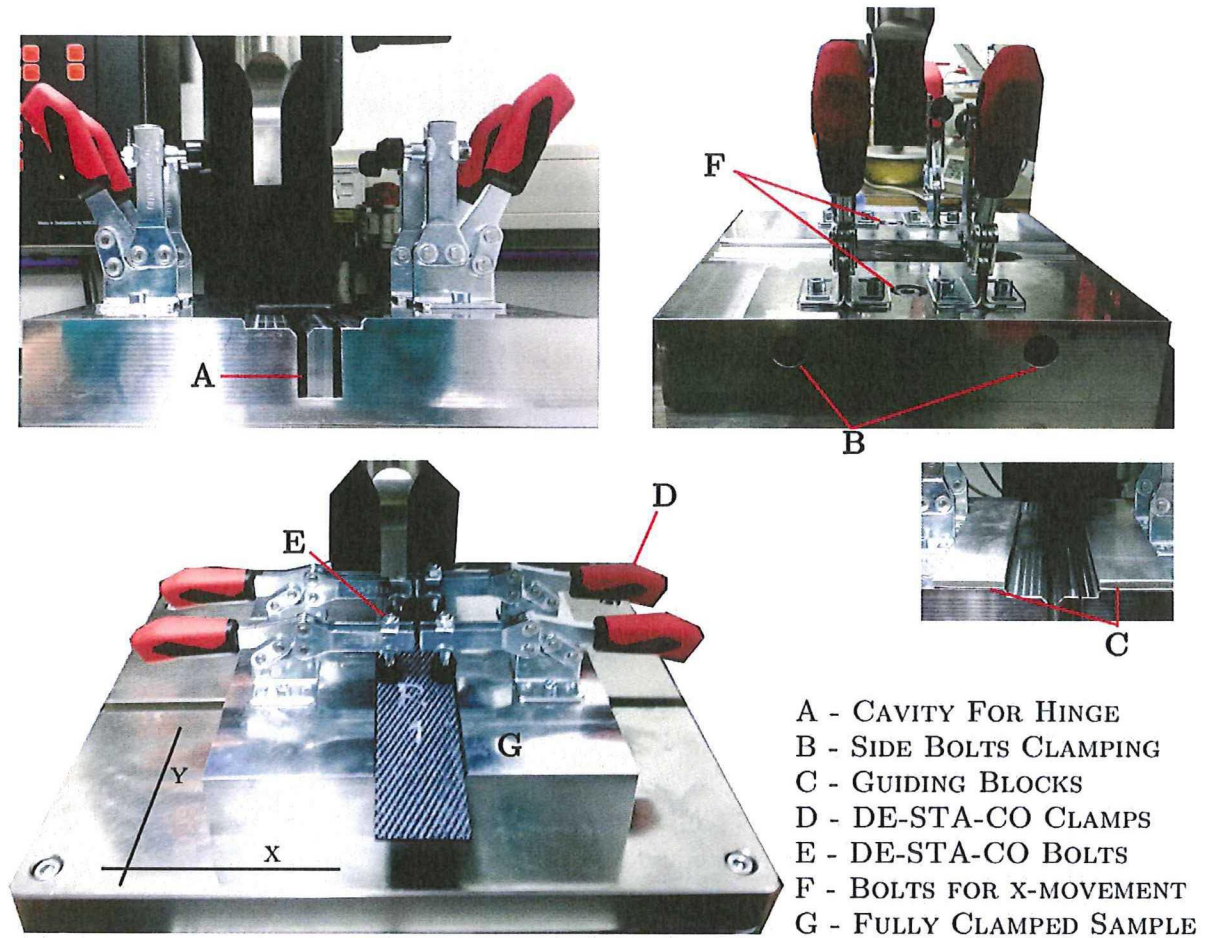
| Detailed overview of the new jig for hinge welding
